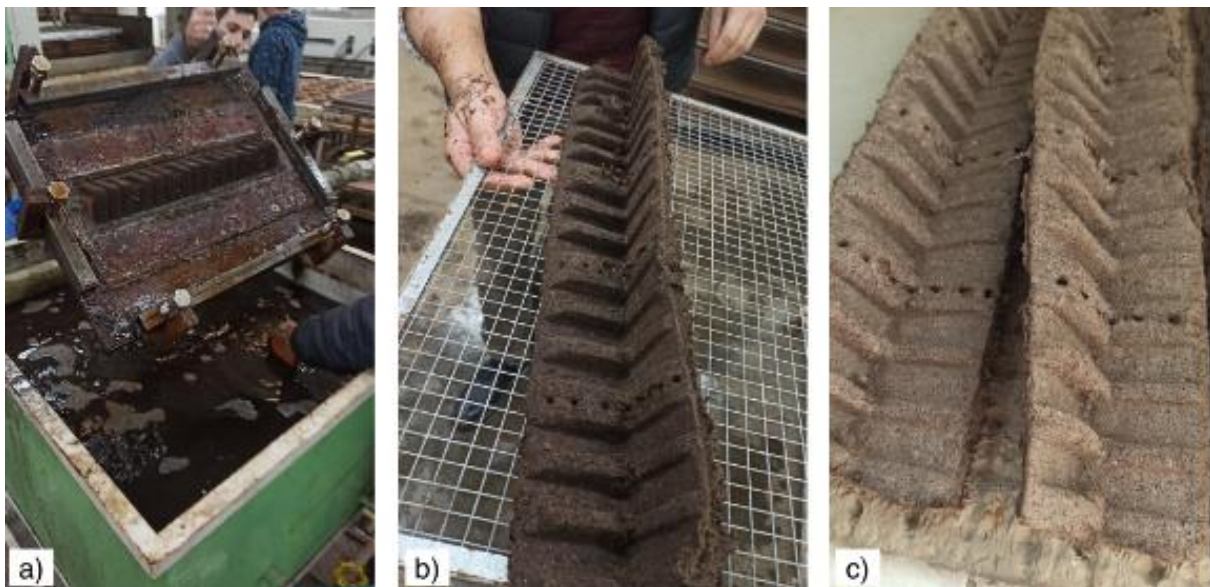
a) Manual transfer molding machine; b) Molded piece with cellulose and coconut powder before drying; c) Dry molded piece.
